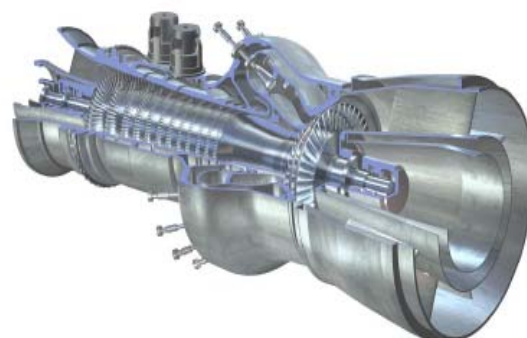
Cut-away view of a gas turbine (Alstom Power)
